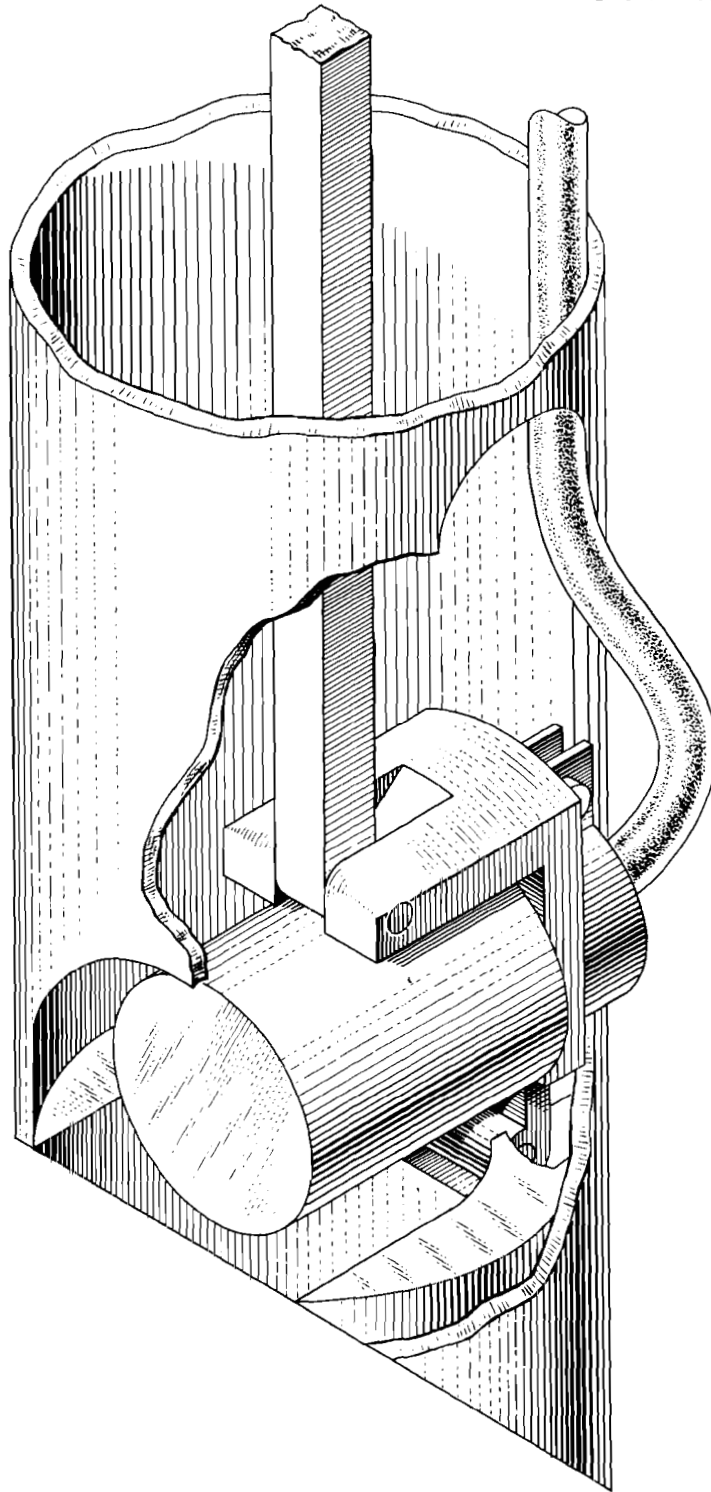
Mechanical Fixture Designed for Ultrasonic Thickness Measurements in Conical Section of HRT Core Vessel.
